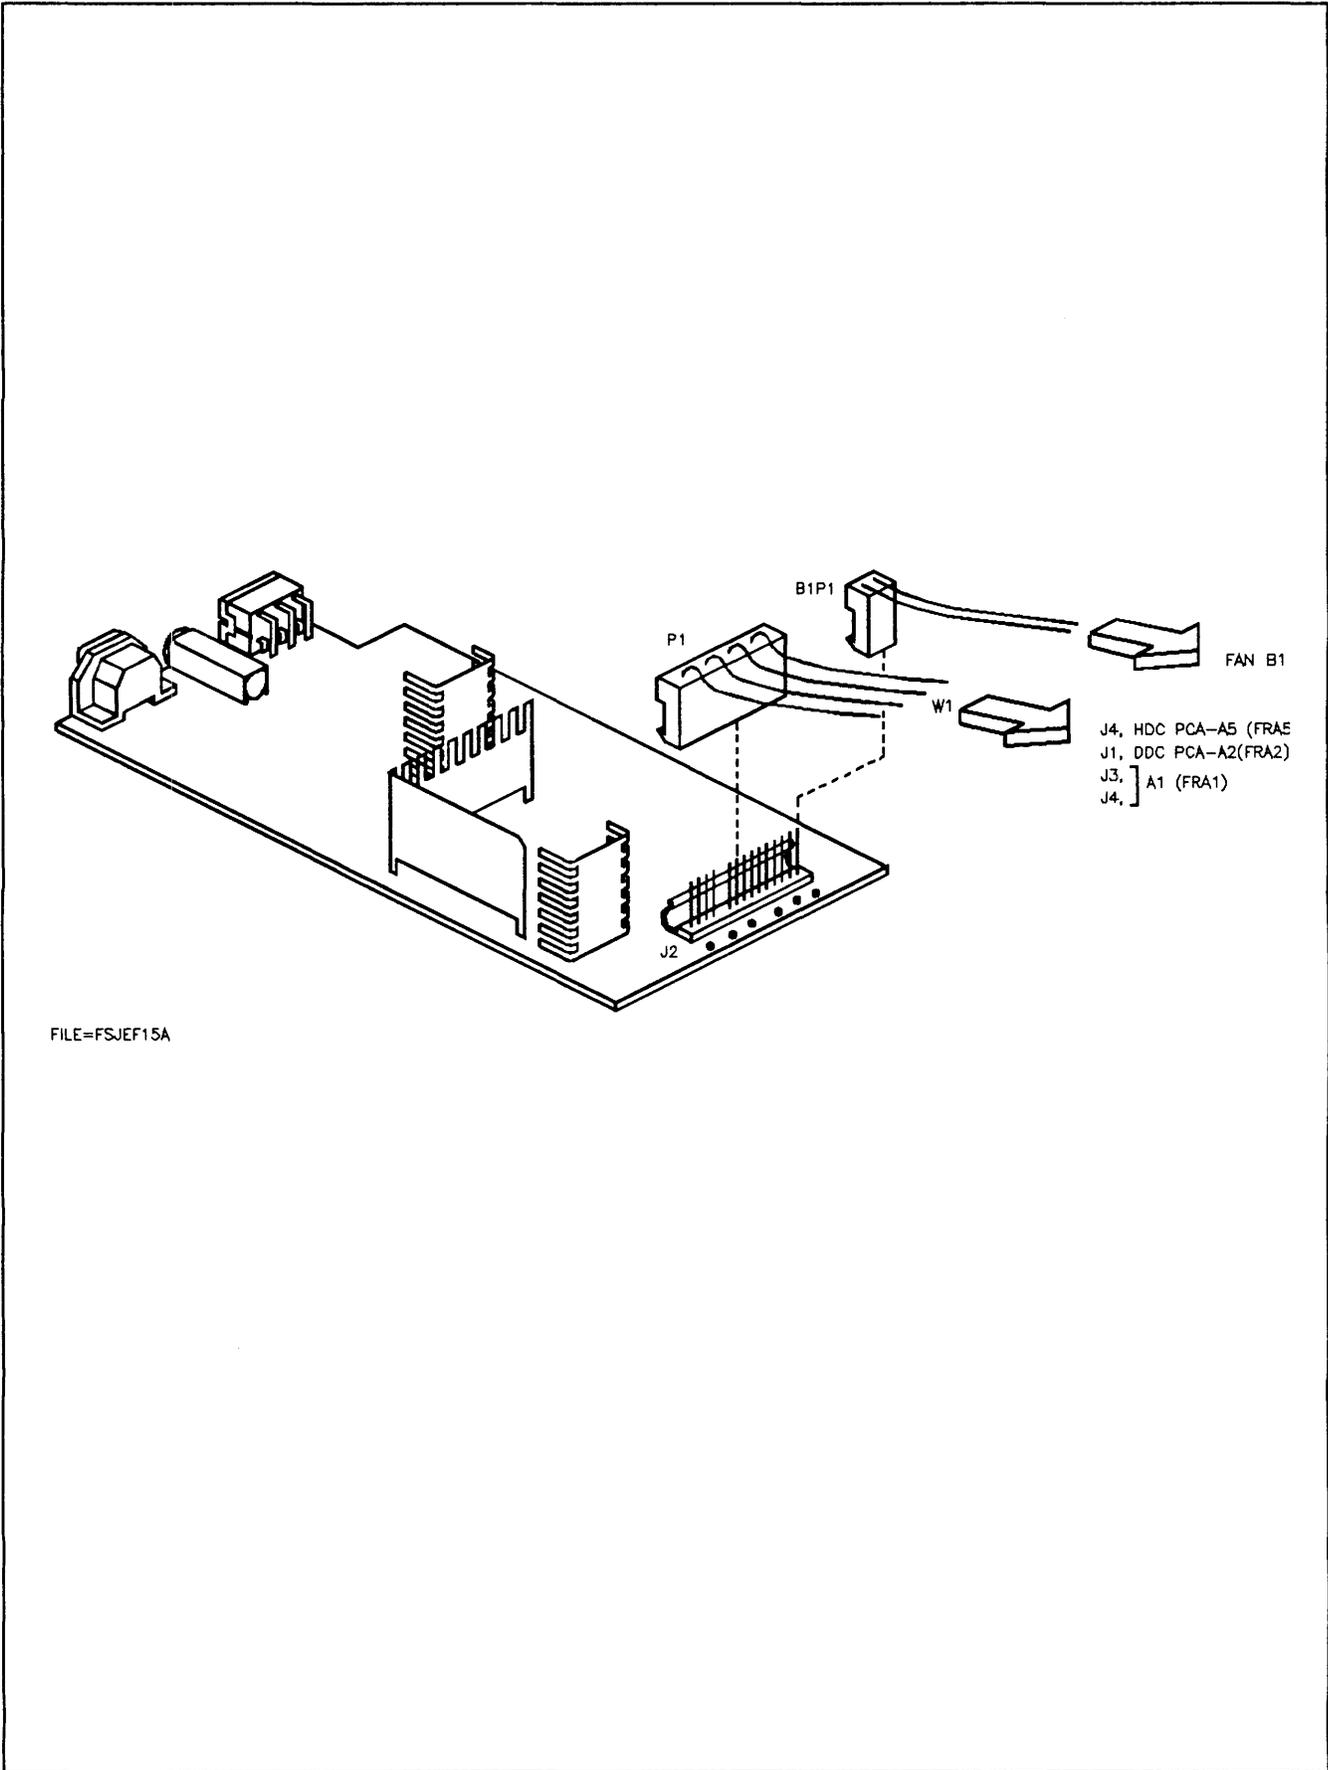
FRA4 (Power Supply A4), Layout and Cable Connections
